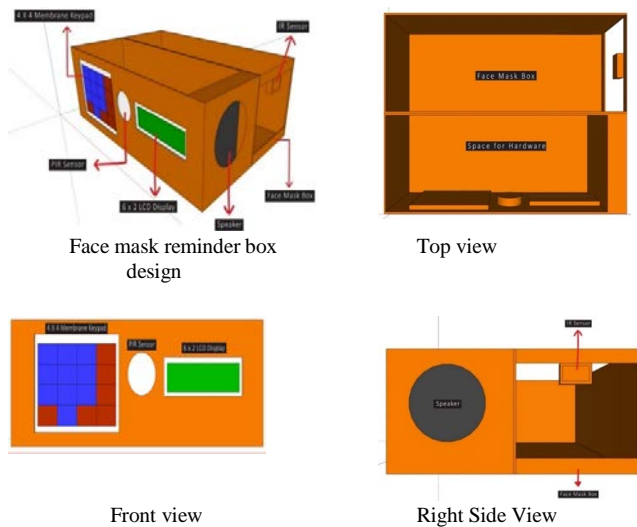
Design of Face Mask Reminder Prototype using SketchUp Software.
